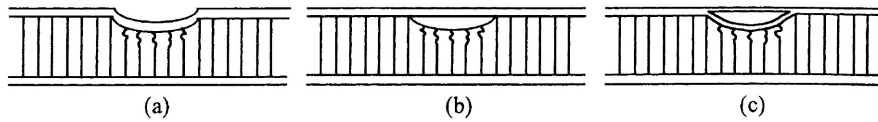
Post-impact core damage: (a) dent retains its shape, (b) facesheet rebound leading to hidden damage and disbond, (c) facesheet rebound leading to hidden damage and delamination [32].
